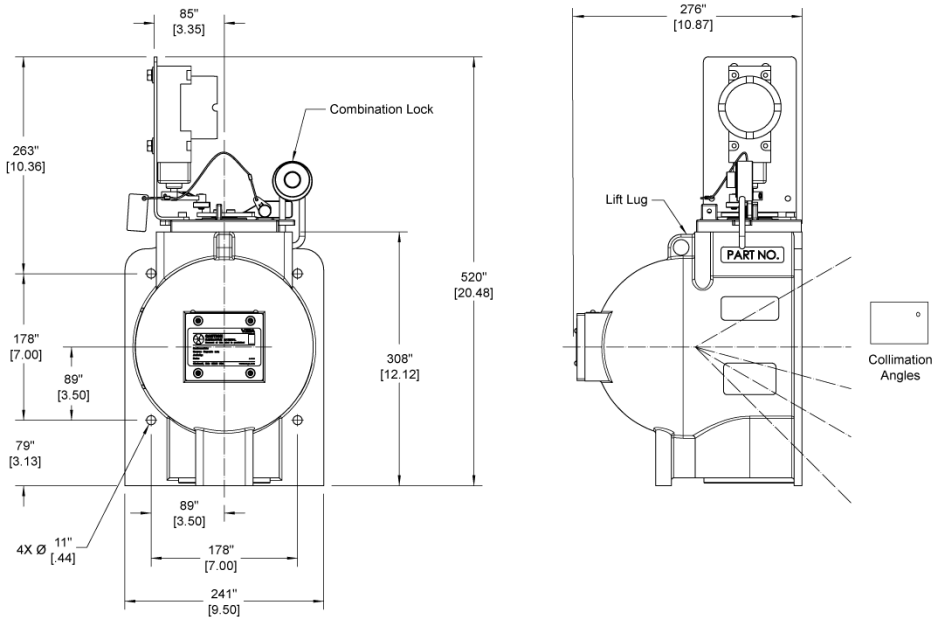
Source Holder SHLD 2 - Explosion Proof with Limit Switch
